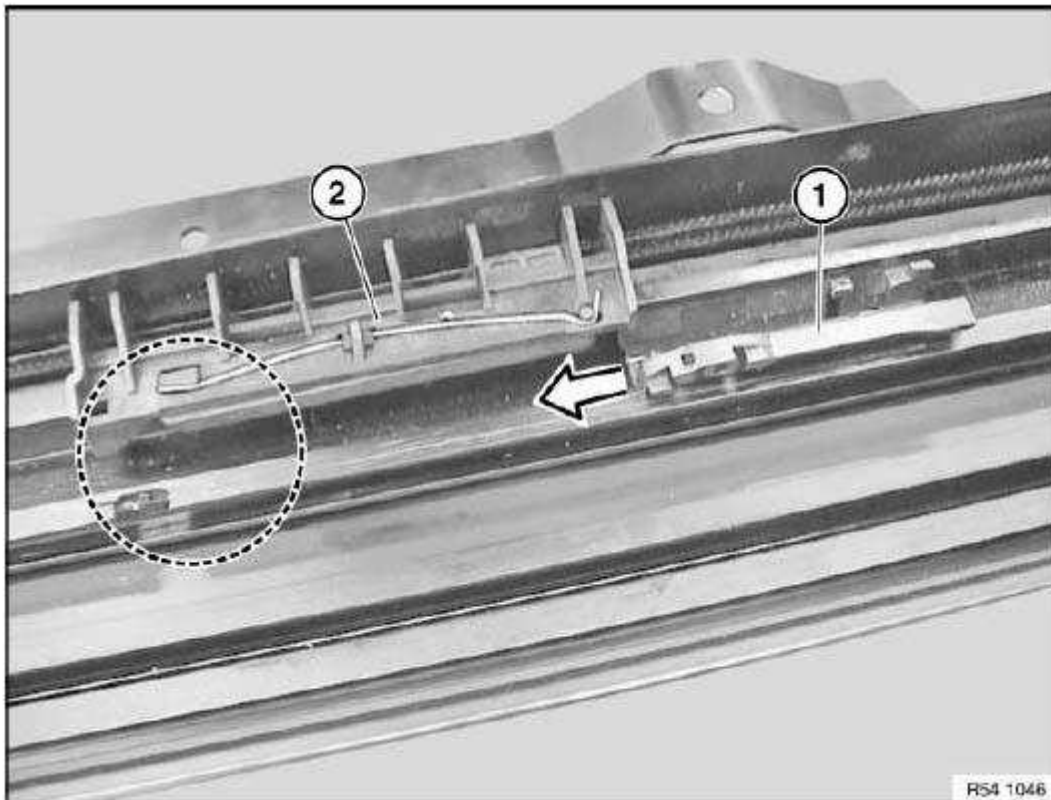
Sliding Drive Cable Plate And Drive Wedge
